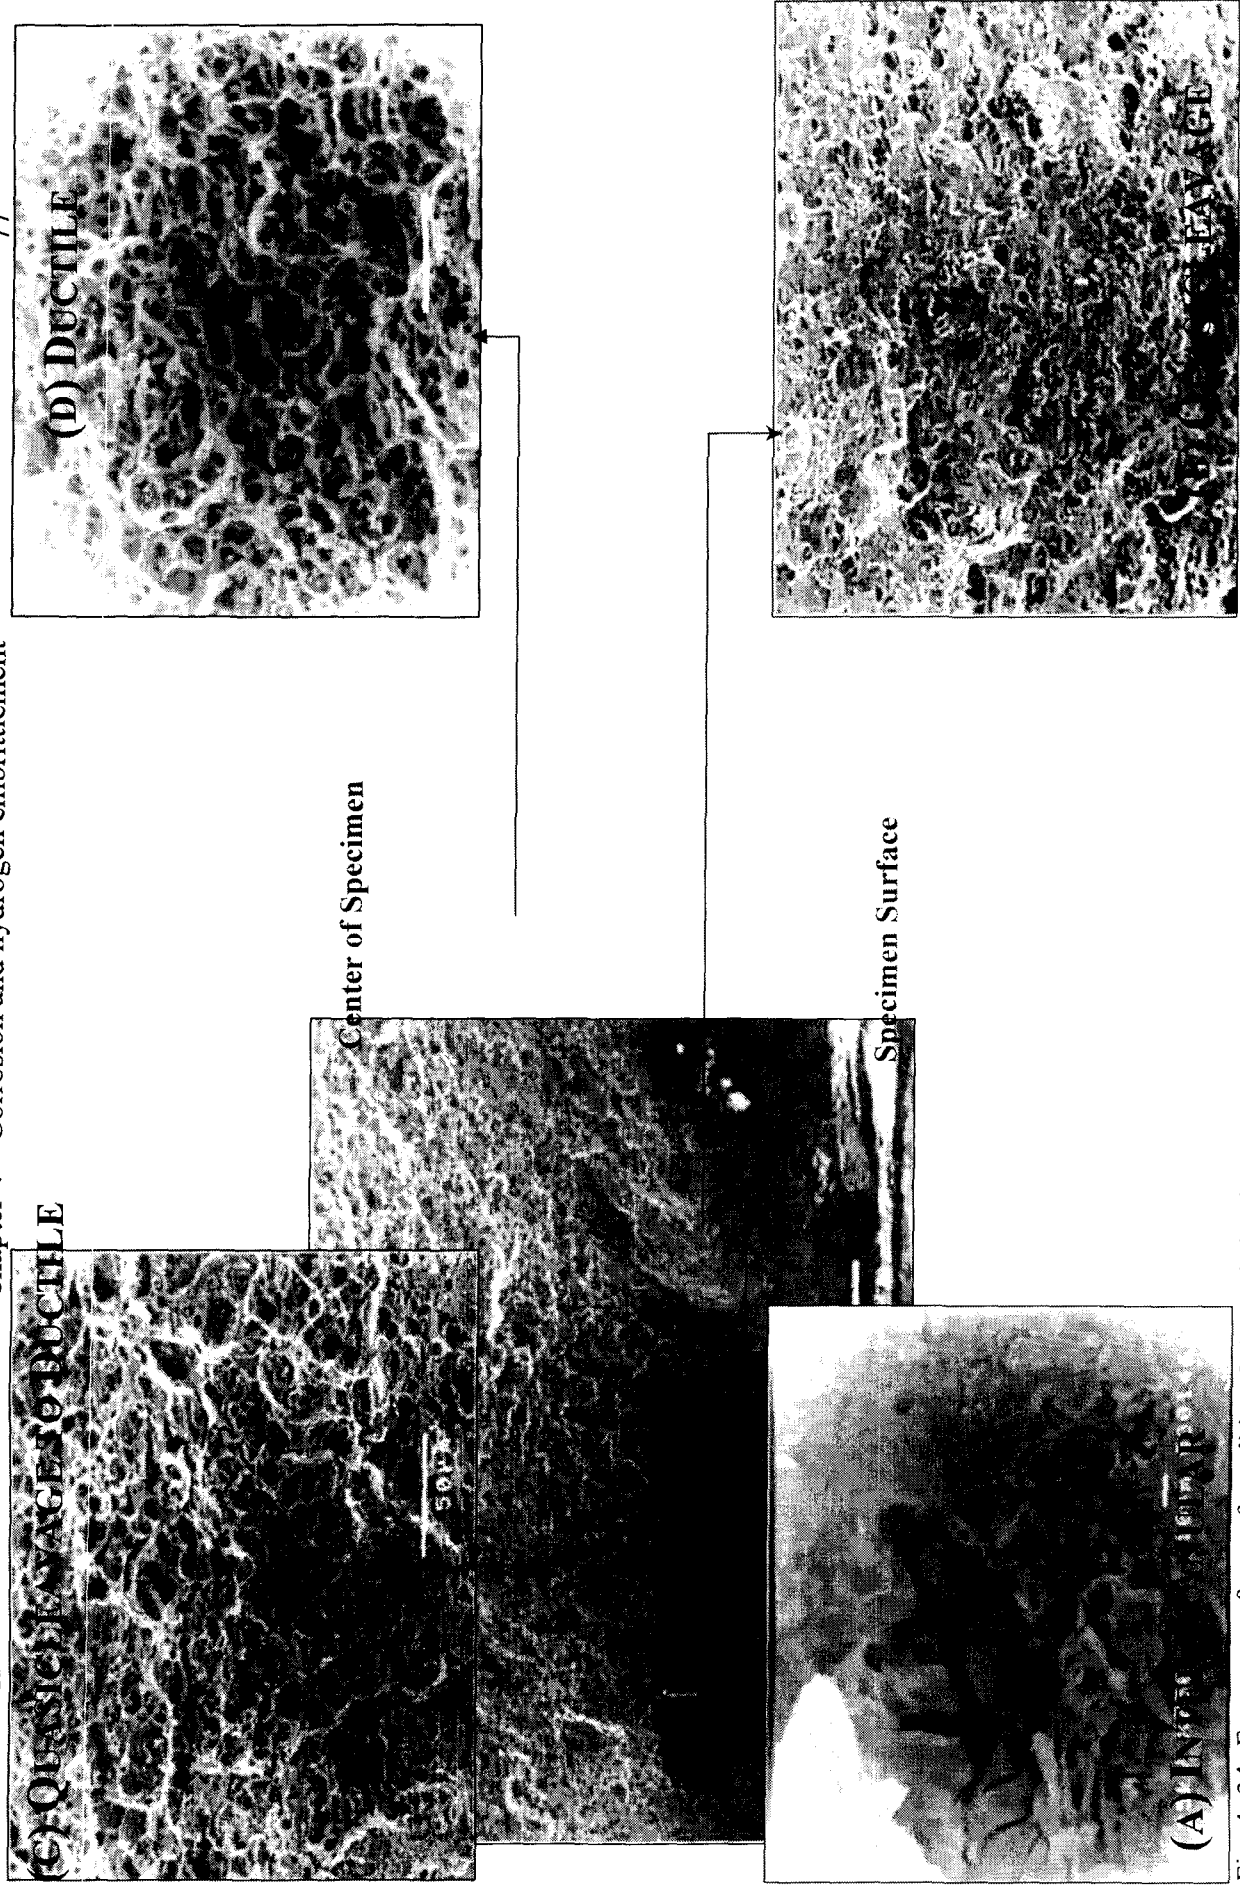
34: Fracture surfaces of condition C (corroded 24h) specimen, bottom surface. Individual photos correspond to different modes of fracture from the specimen surface (on start of corrosion) through the center of the specimen.
